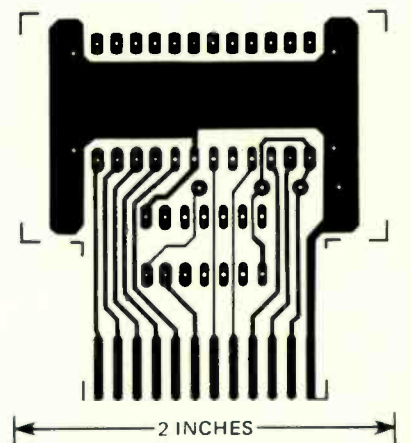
THE FOIL SIDE of the double-sided board is shown here..
